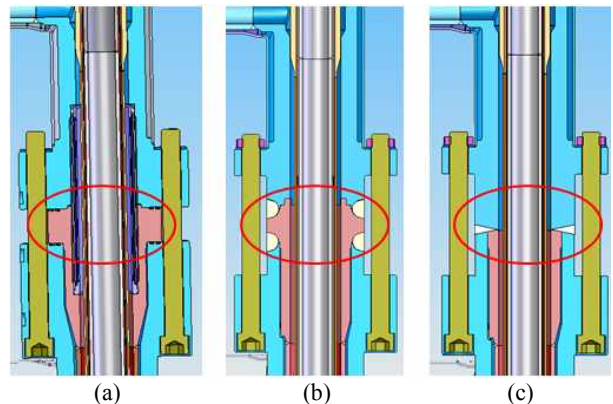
Welding design for the double pressure vessel (a) Former design (b) TIG welding design (c) EB welding design
